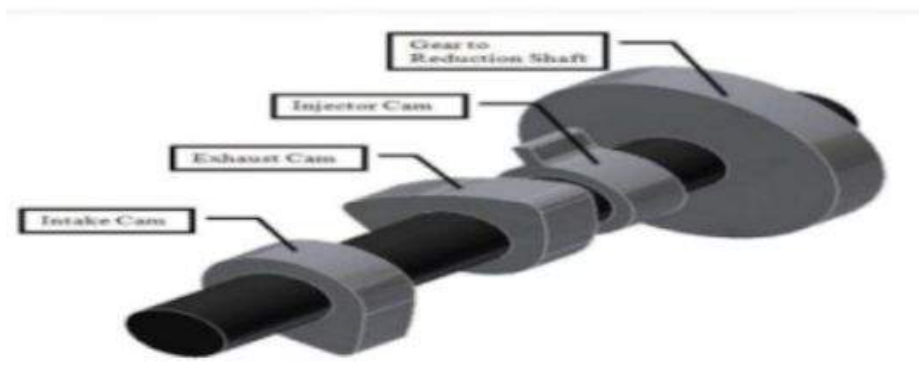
Six-stroke Flat and Spherical Camshaft Follower (Saurabh, 2015)
